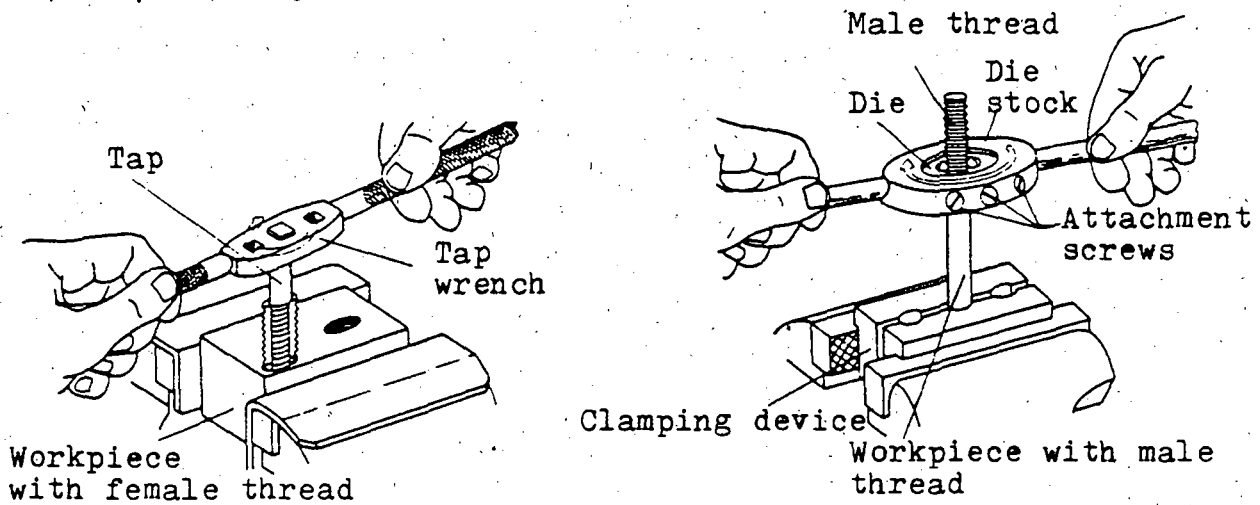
Thread cutting by hand (a) : Workpiece with male thread
